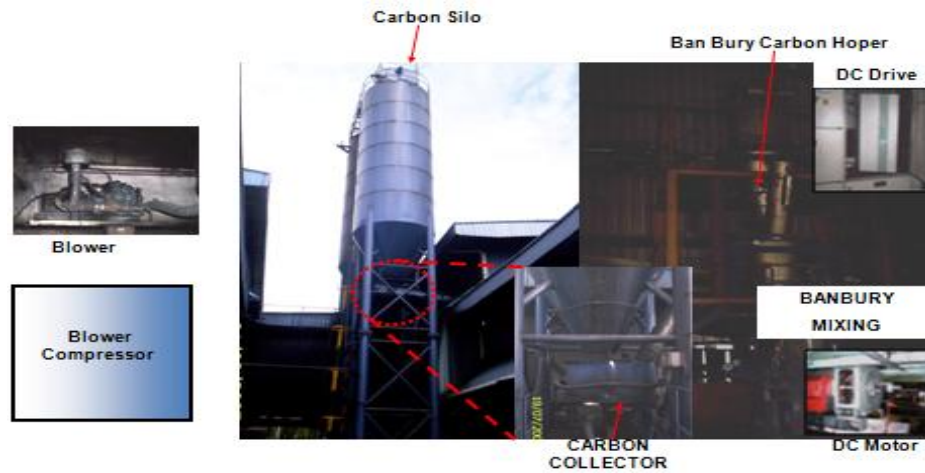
Banbury machine which using in Banbury mixing process.
